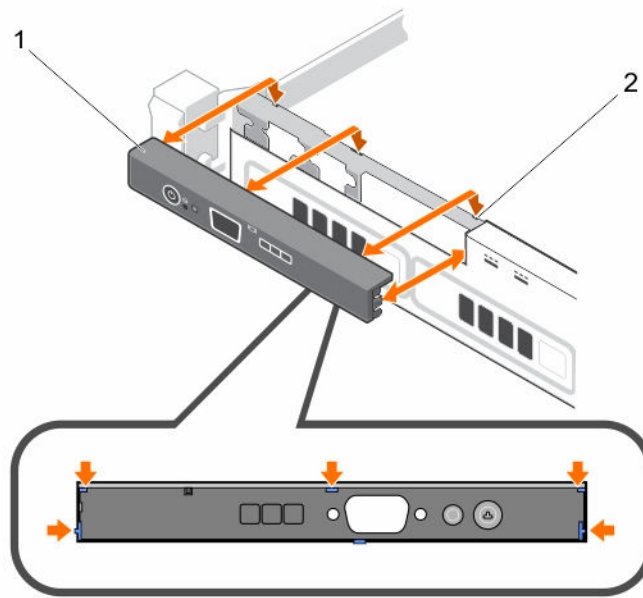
Removing and installing the control panel—four 3.5 inch hard-drives chassis
